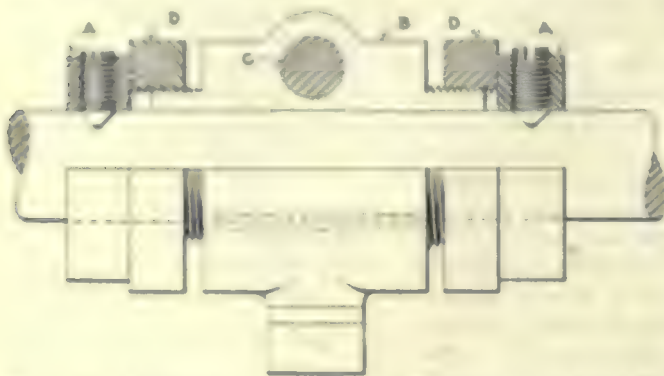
ARRANGEMENT FOR ADJUSTING CAM ROLLER
